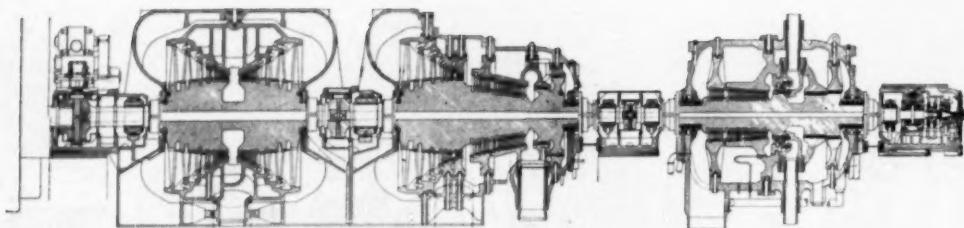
ASSEMBLY OF 125-MW 3600-RPM TANDEM REHEAT TURBINE, THREE-CYLINDER, TRIPLE-FLOW TYPE
